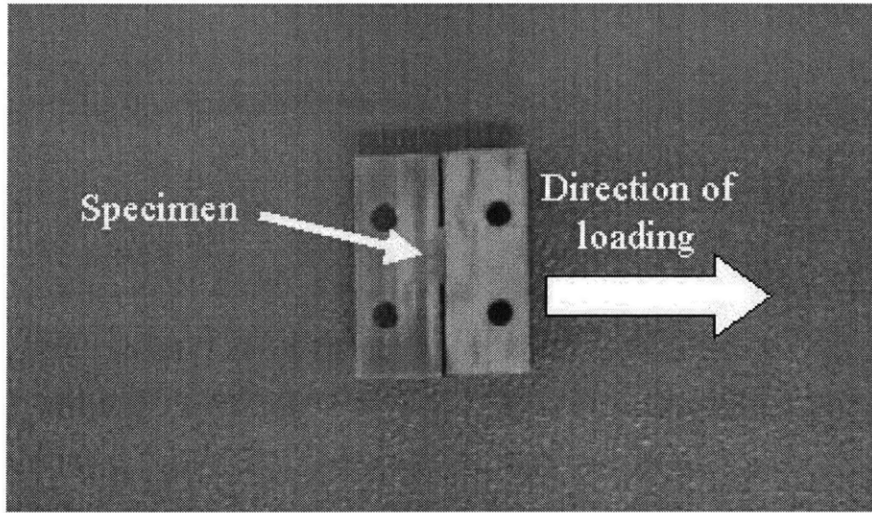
Through-thickness tension fixtures with specimen glued in place.
